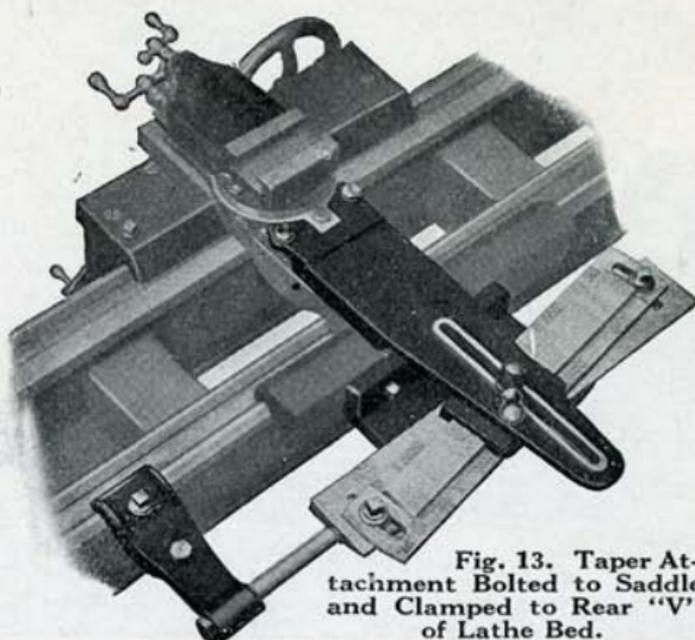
Taper Attachment Bolted to Saddle and Clamped to Rear "V" of Lathe Bed.
